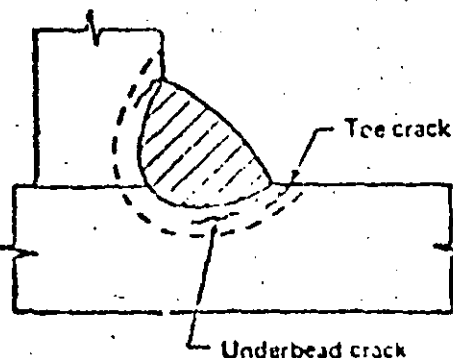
Underbead cracking and toe cracks caused by hydrogen pickup in heat-affected zone of plate
